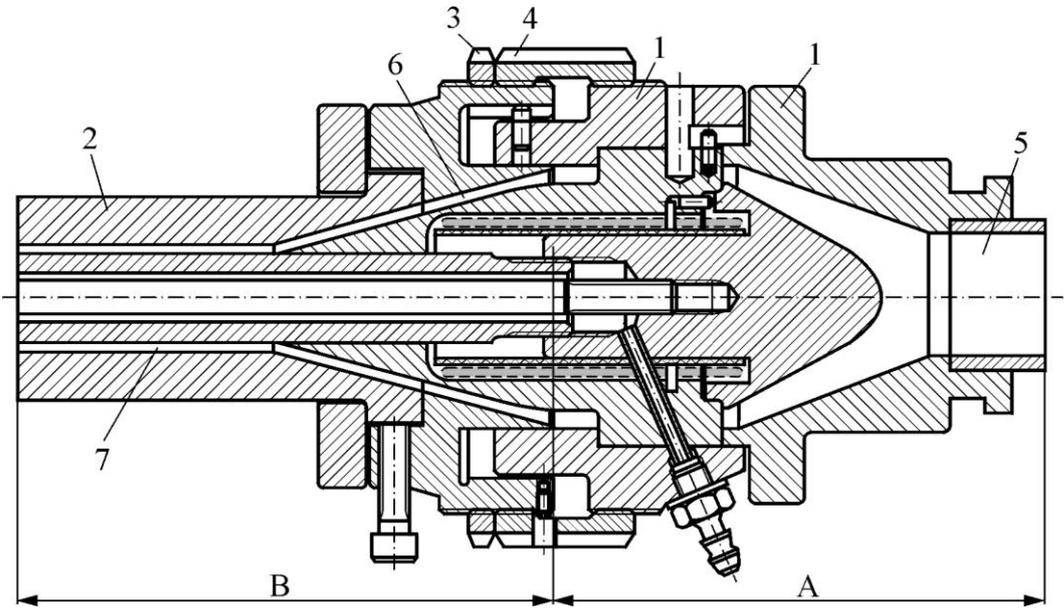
A fragment of the longitudinal extrusion head (with a dividing sleeve) for pipes: 1 – dividing sleeve, 2 – dividing channels, 3 – element fixing the mandrel torpedo (American Maplan, USA)
